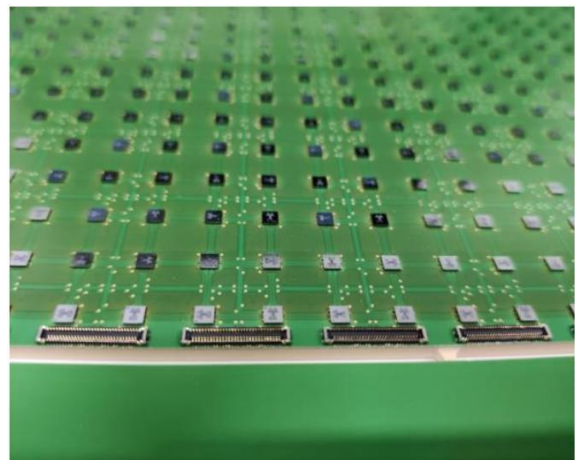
Bottom side of the HSF board with controller chips for top metasurface patches control.
